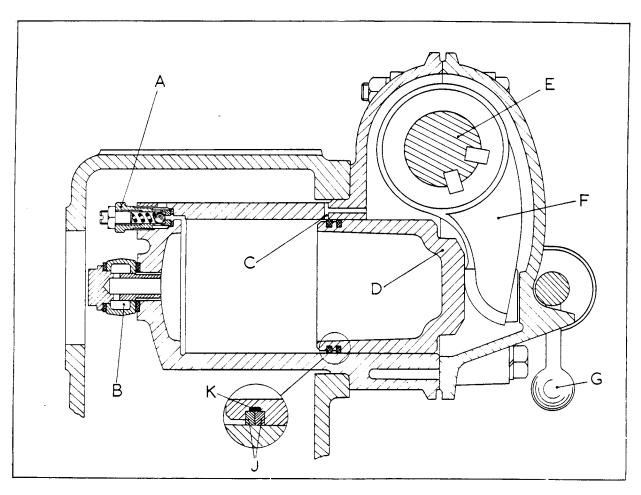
SECTION THROUGH RAM CYLINDER (Early series tractors)
